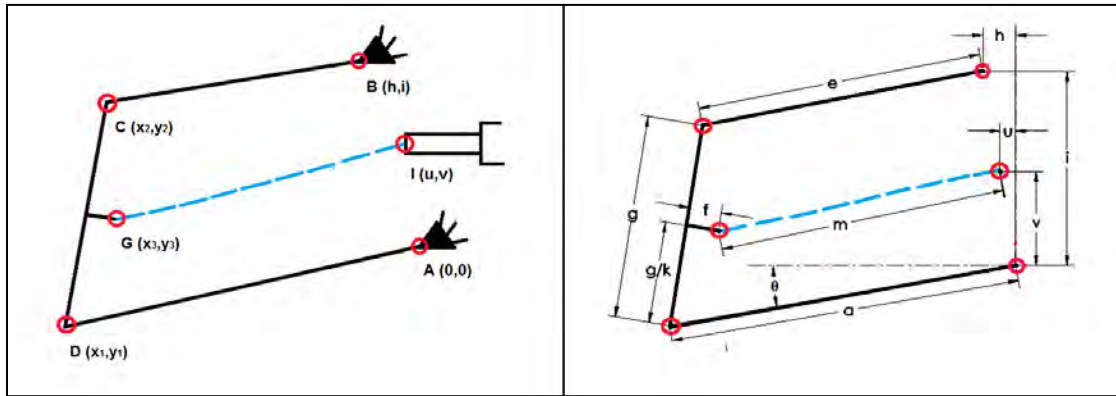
Dimensional parameters of the Baja SAE 2009 suspension mechanism.
